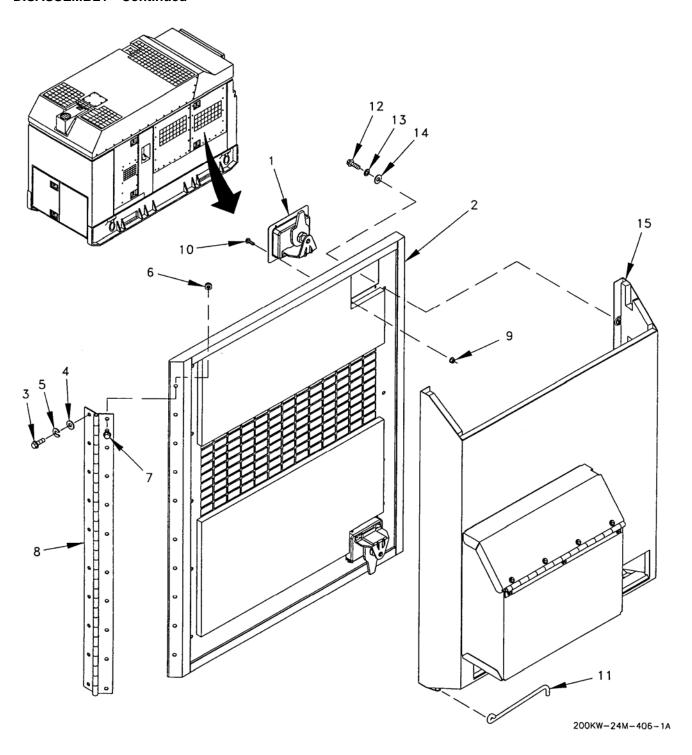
Left Rear Door Assembly (Latch) (Sheet 1 of 2).
